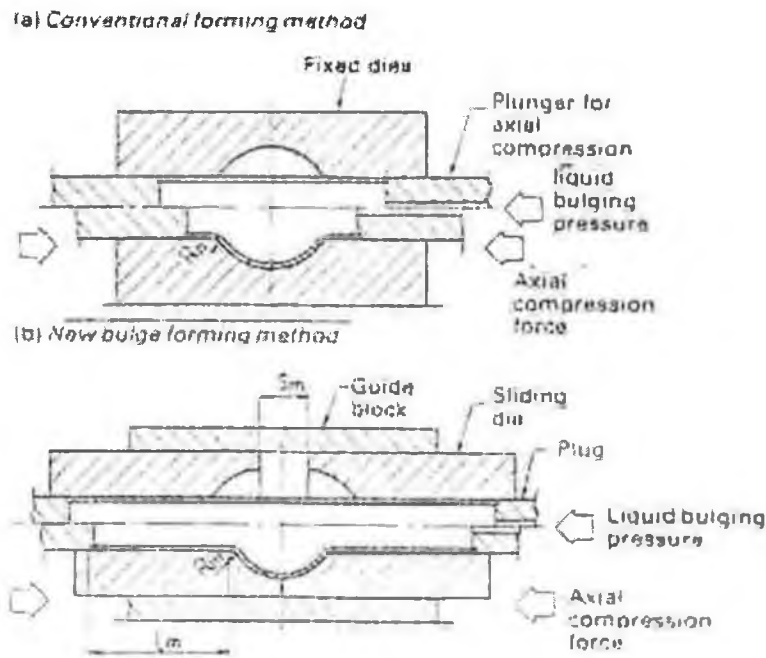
Flexible dies used for bulge forming [25, 26]
